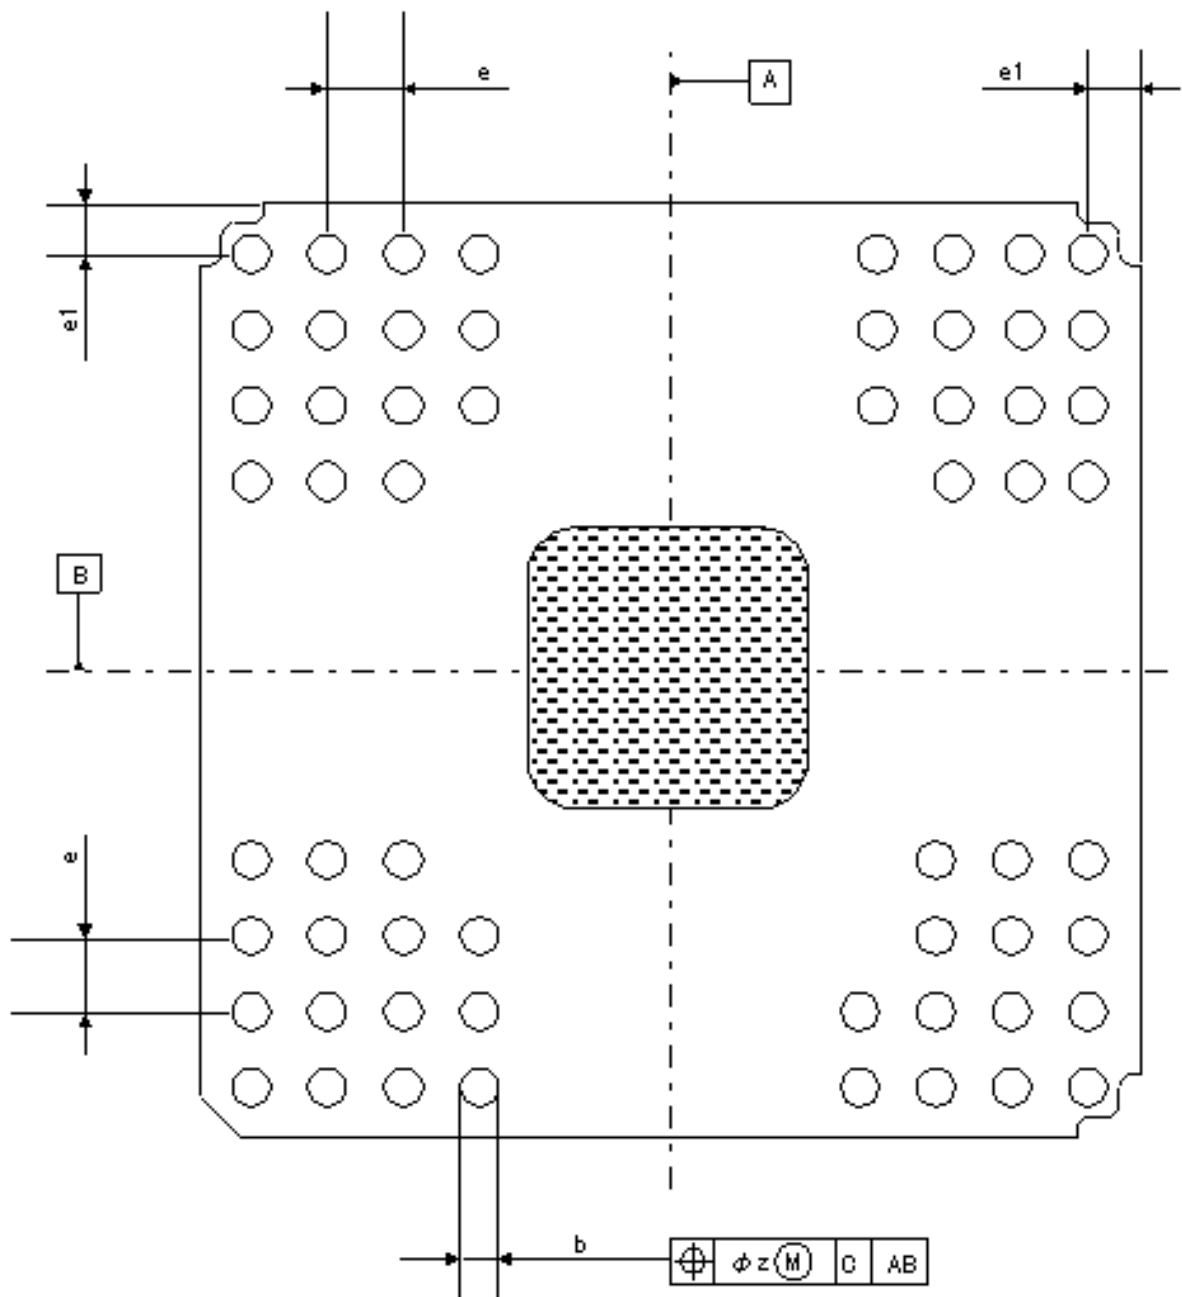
T-BGA256 Outline Dimensions Bottom view
